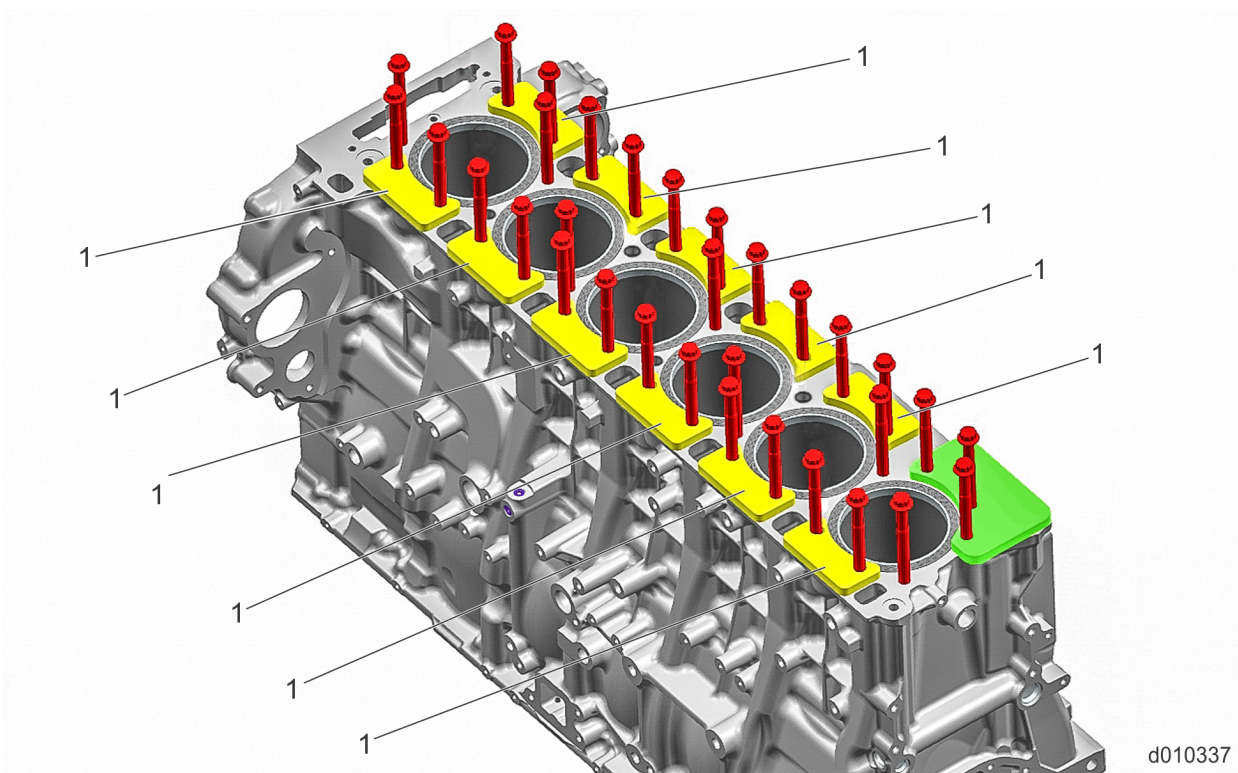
DK1470E16024-2 - Cylinder Top Plate
